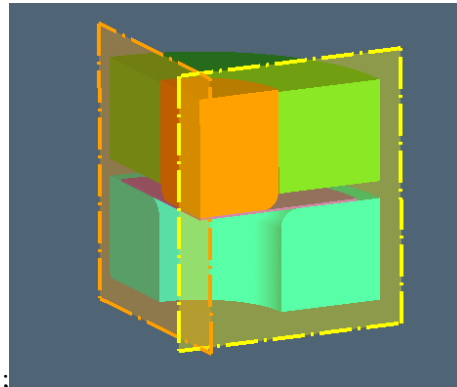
Symmetry planes of deep drawing tool and metal sheet
